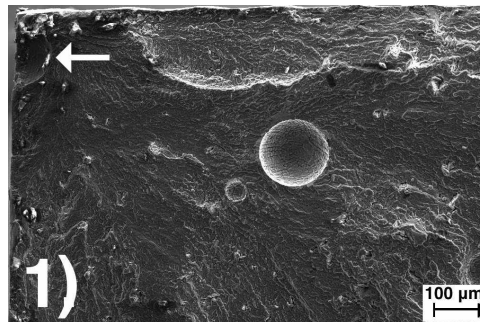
Initiation point of the fatigue crack up in the left corner and large internal pores of as welded AA6082.52-T6.
